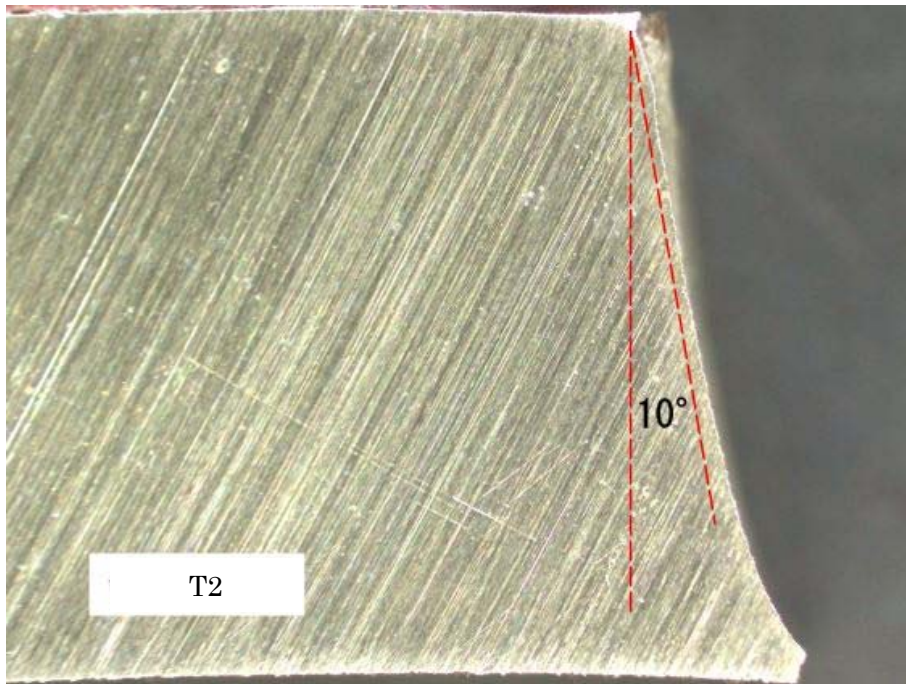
Cross-section of fracture specimen2 (T2).
